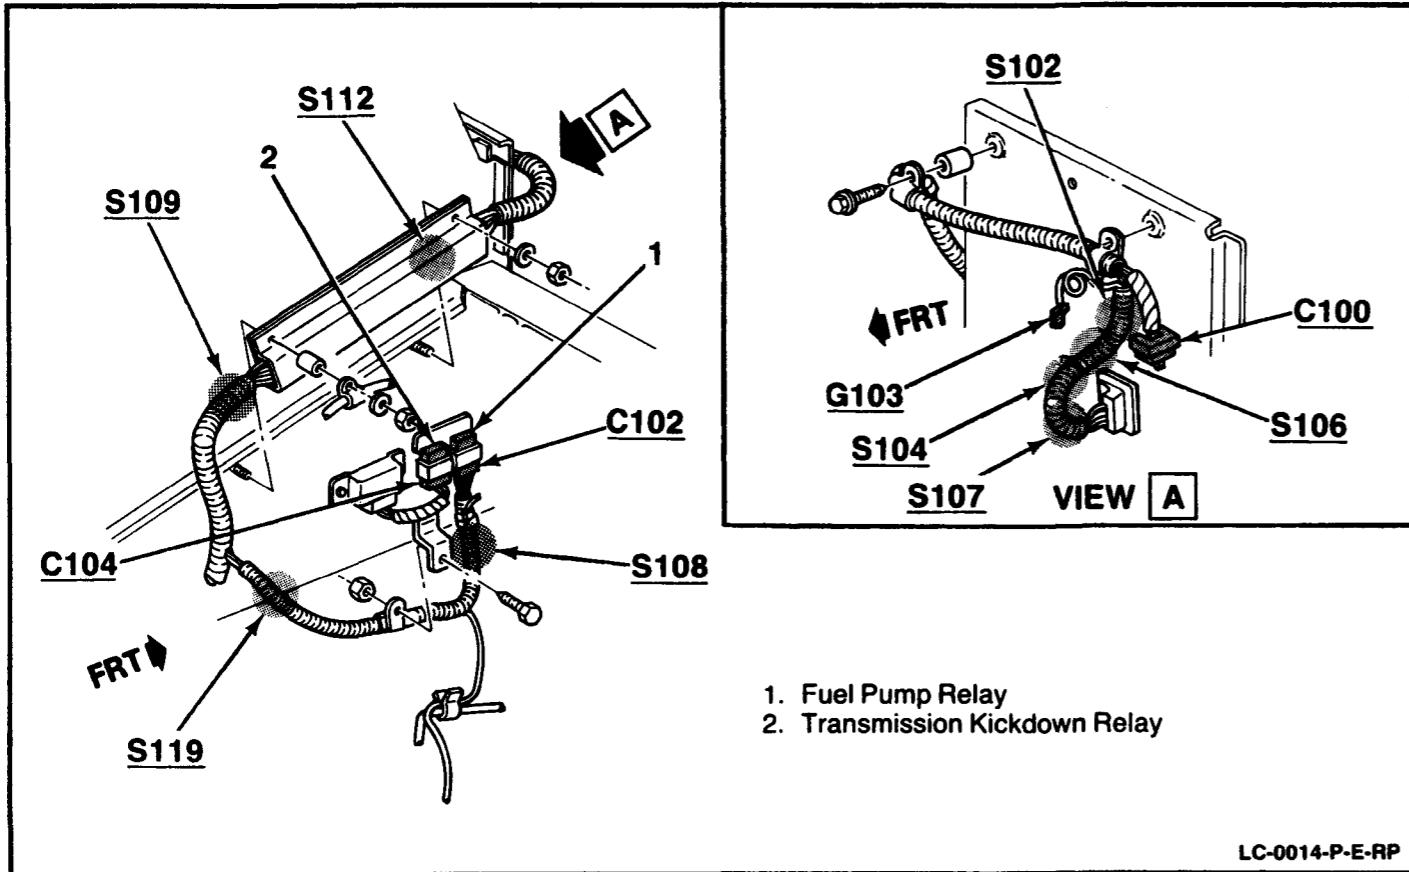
Engine Wiring Harness to Cowl (RPO L19 w/P32)
